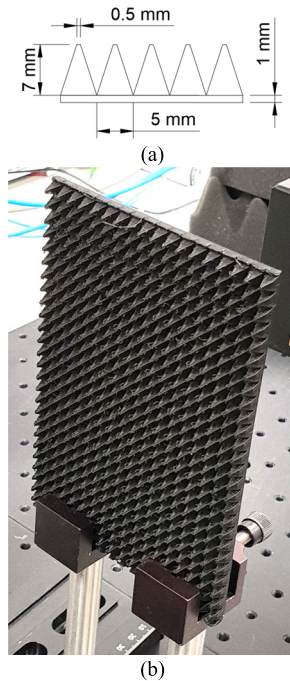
FDM 3-D printed pyramidal RAM: (a) cross-sectional CAD drawing; and (b) photograph.
